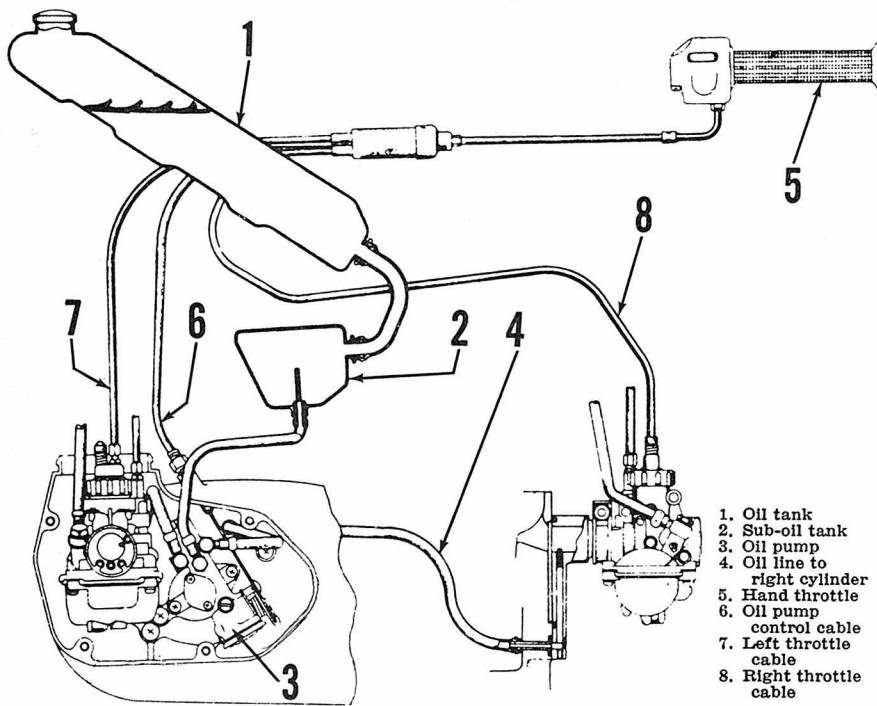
Drawing of engine oil metering system. On early models (shown), the oil level sight gage is in sub-oil tank. On later models, oil tank is on right side.
